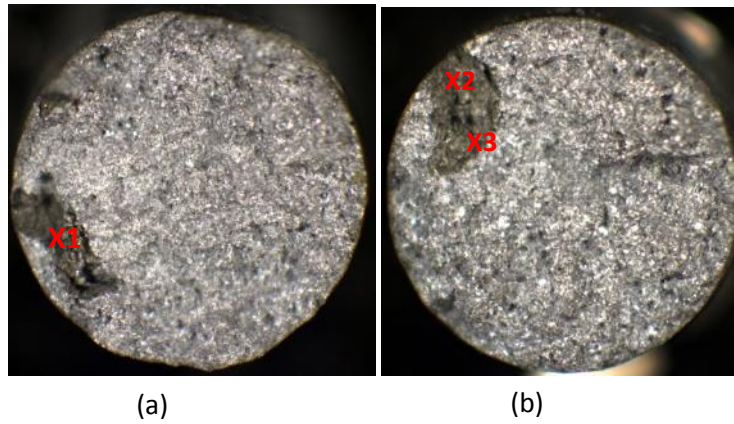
Fracture surface of tensile test bar (a) No. 20 and (b) No. 6 of 2L99+W alloy.
